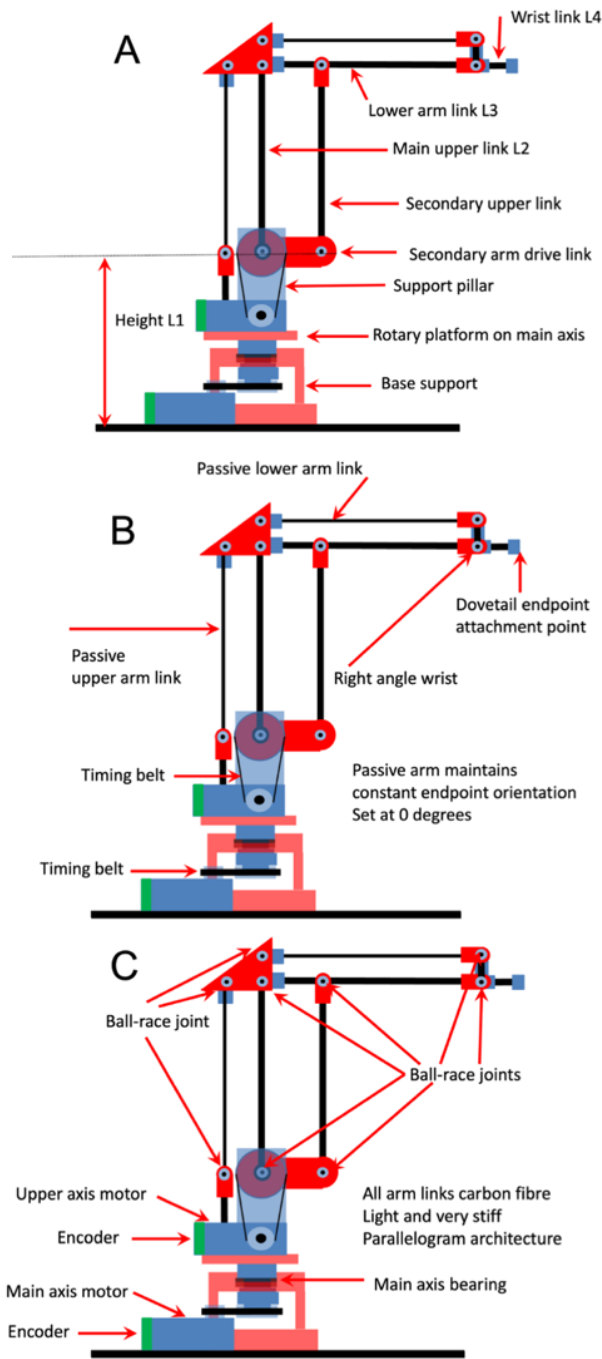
Robot viewed from the side. Panel A: Depicts the main components of the base and upper parallel arm links. Panel B: Shows the passive arm components and drive belts for the main arm. Panel C: Highlights the locations of the bearings, motors, and encoders.
